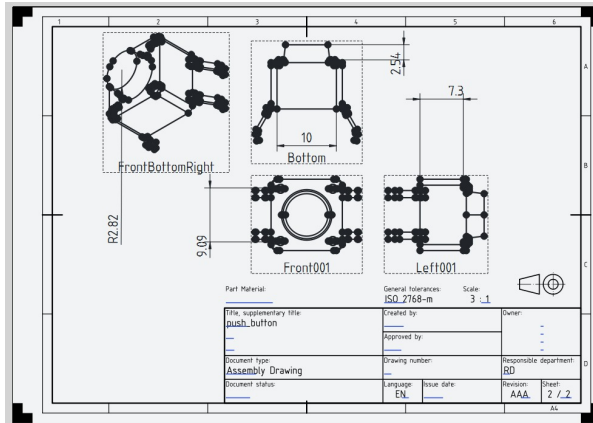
Drawing of Push Button(Produced using FreeCADweb)
